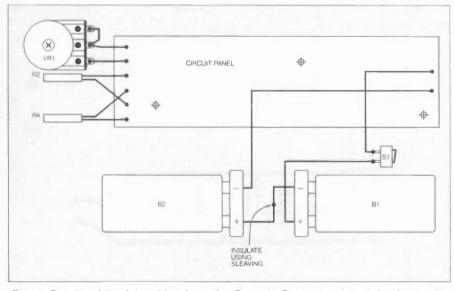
Details of the interwiring from the Draught Detector printed circuit board to the off-board components.
